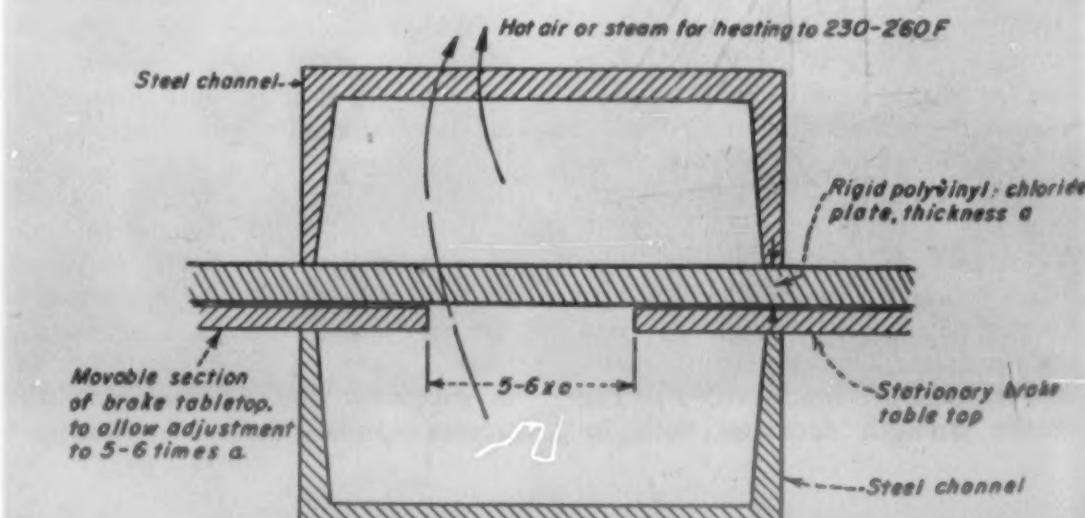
Schematic view of heating arrangement for bending brake using heated air or steam.
